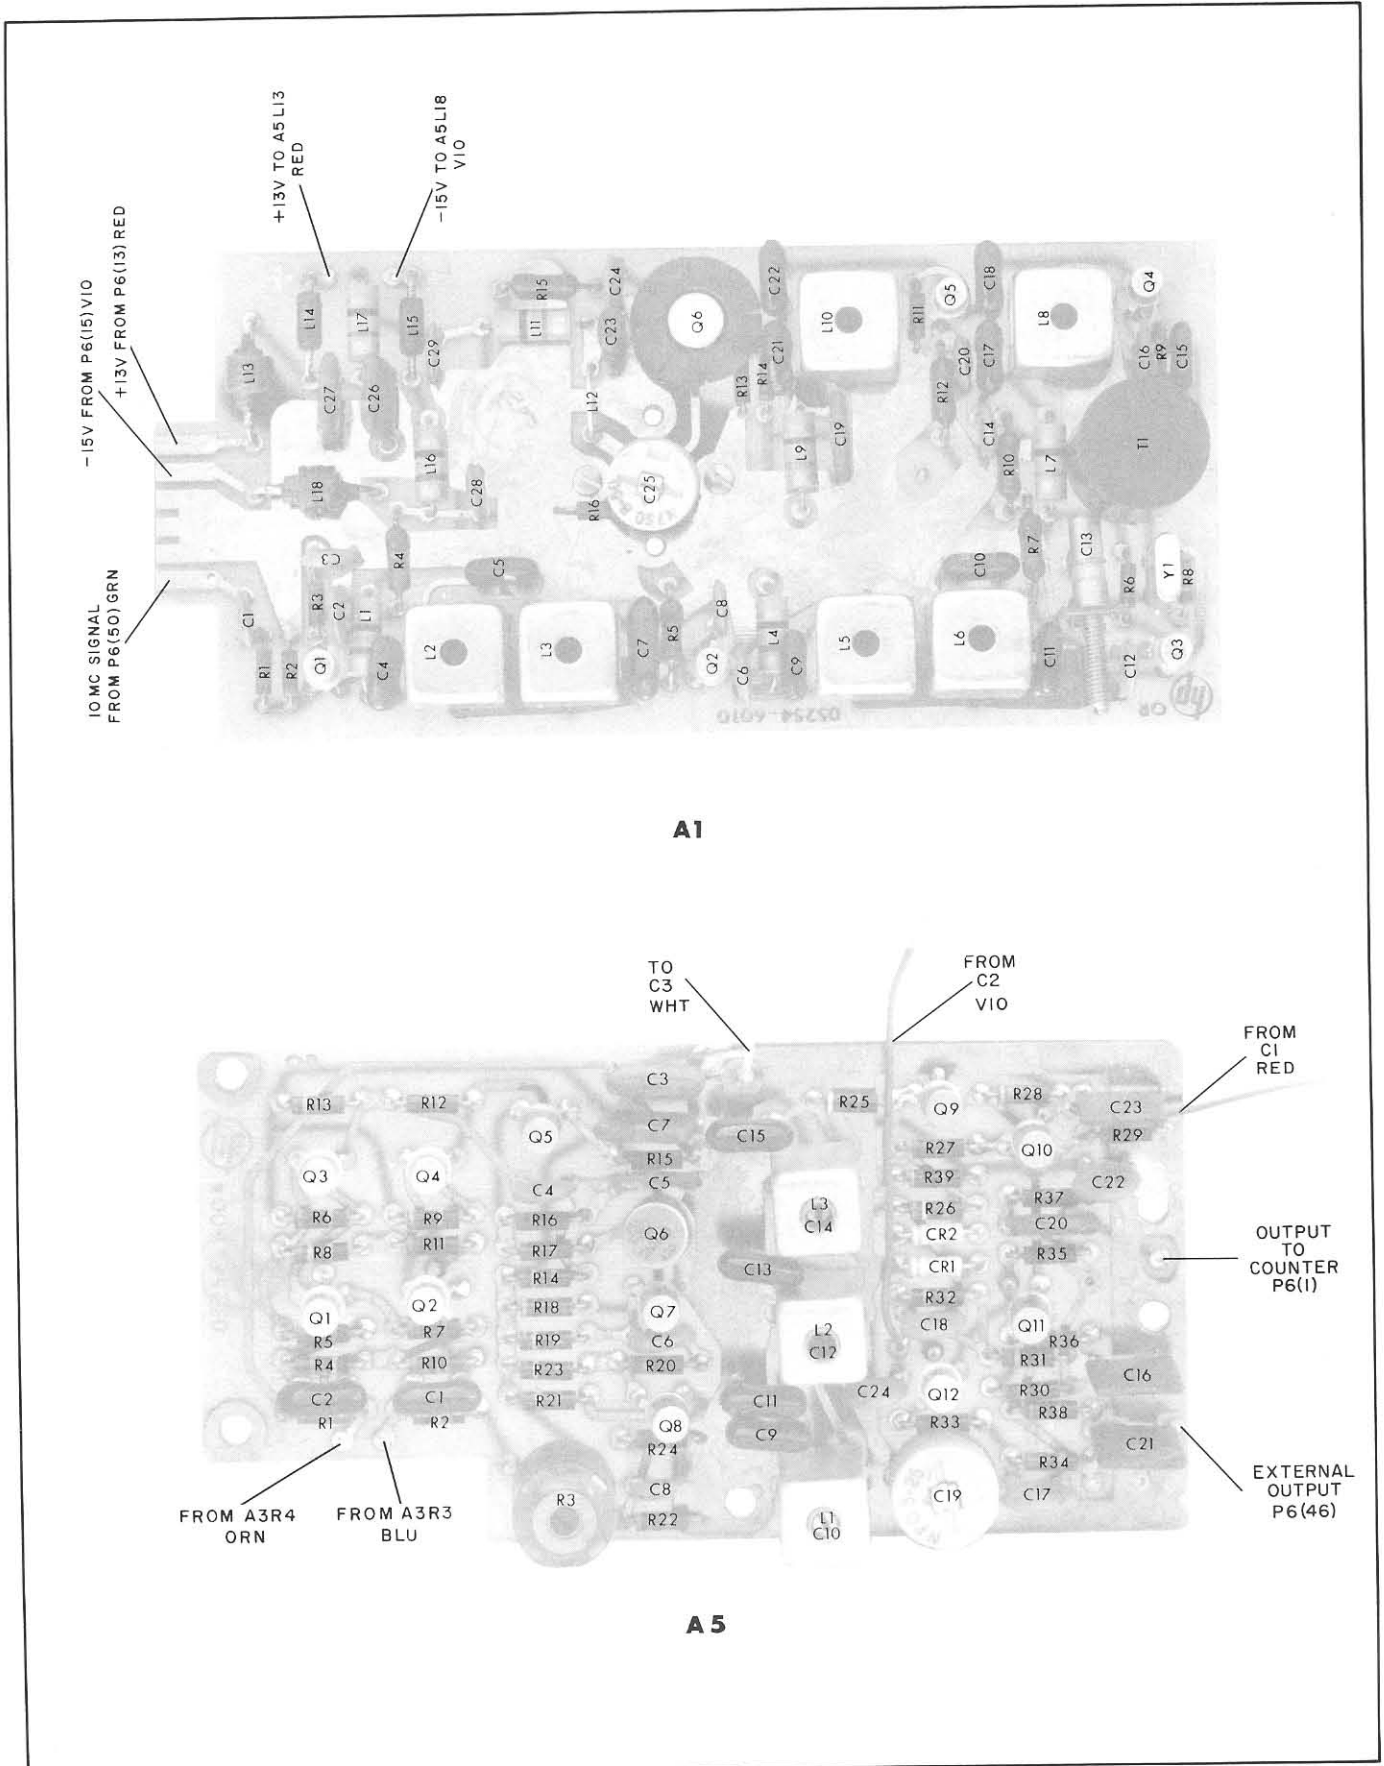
Multiplier Assembly A1, and Video Amplifier Assembly A5 Component Location (5254A)
